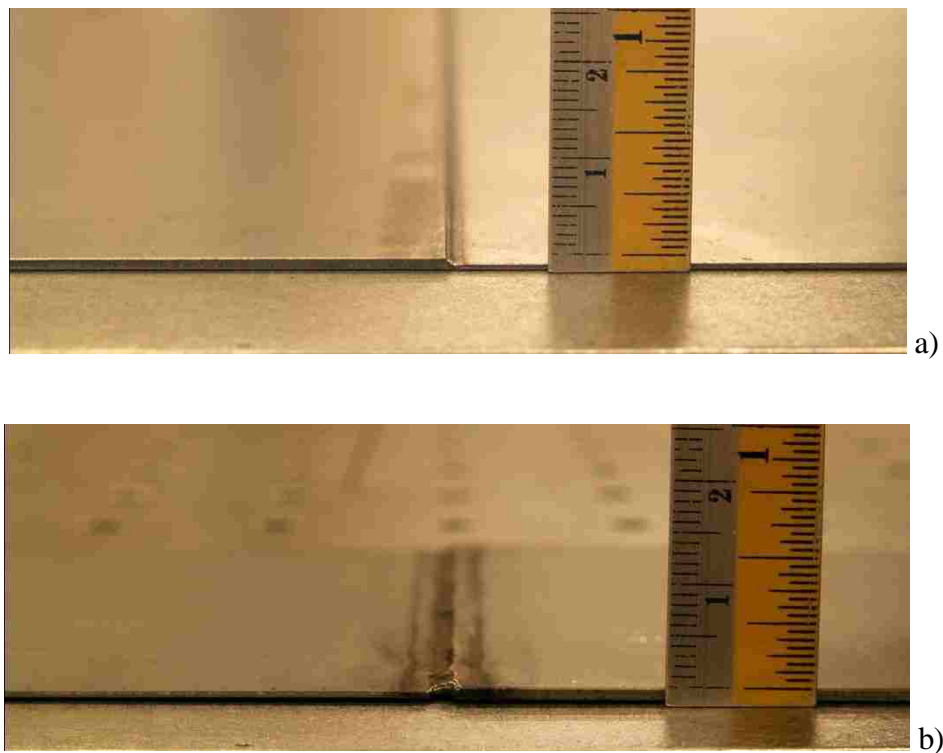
Distortion in a) laser and b) TIG welding
